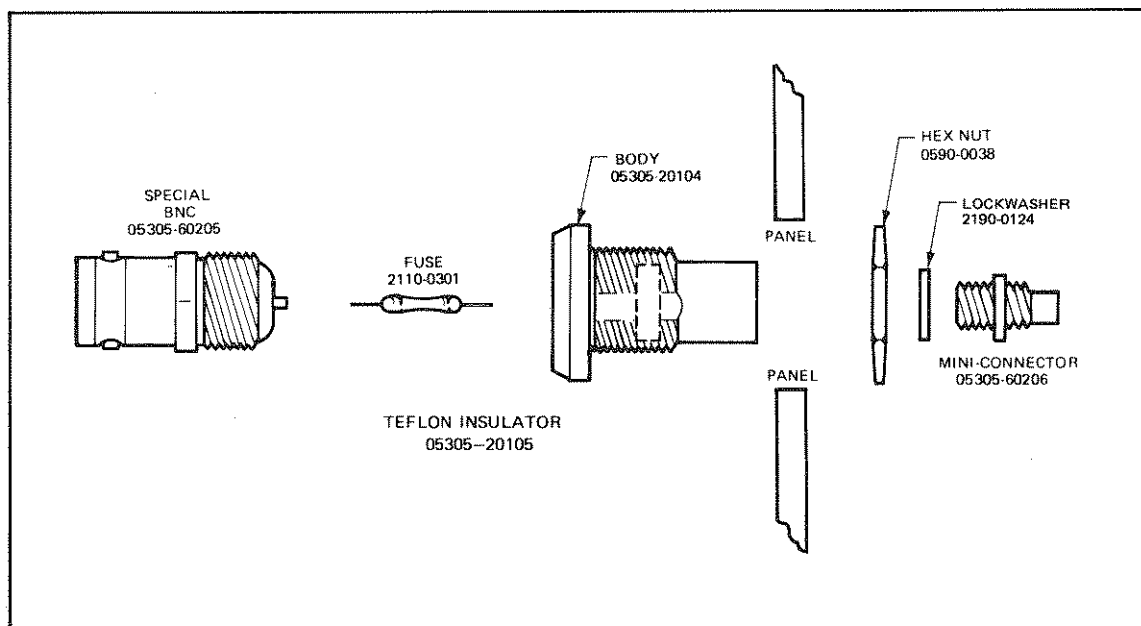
Details of Input Connector J1 and Fuse Mounting
